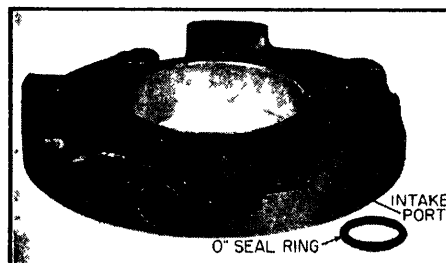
Locating front pump intake pipe "O" seal ring. 1952
